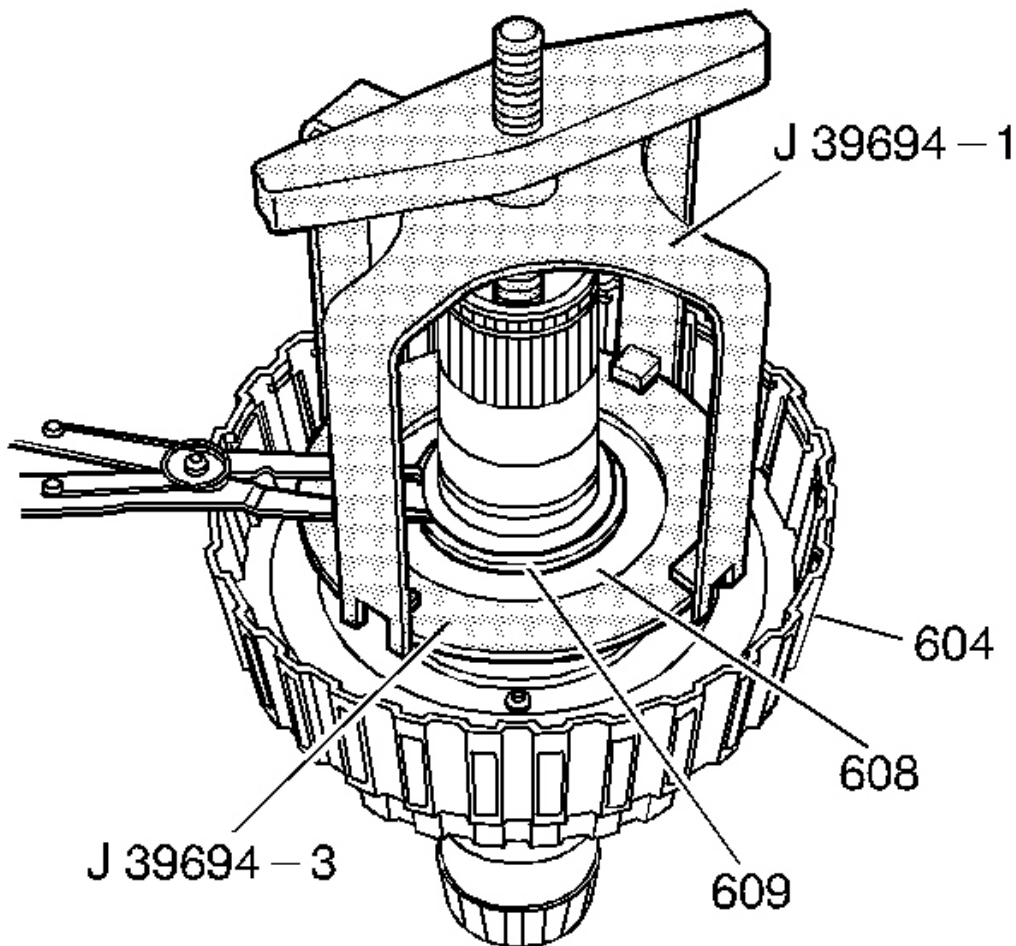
Installing Clutch Spring Compressor And Compress The Spring Using J 39694
